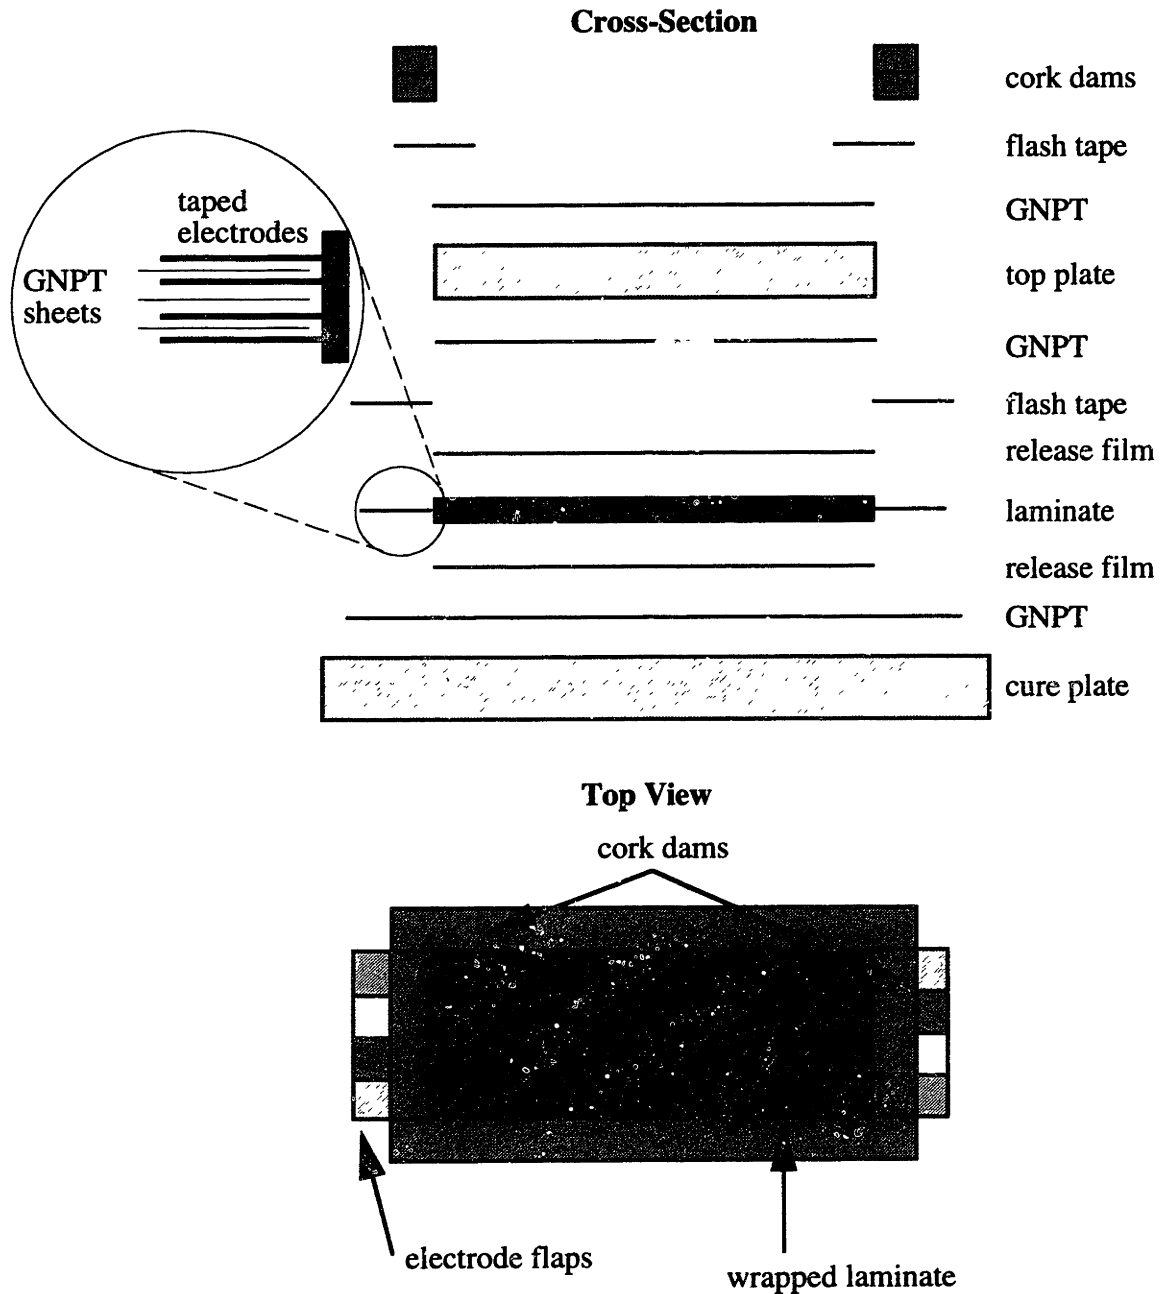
Cure assembly cross section and top view with electrode flaps extended.
